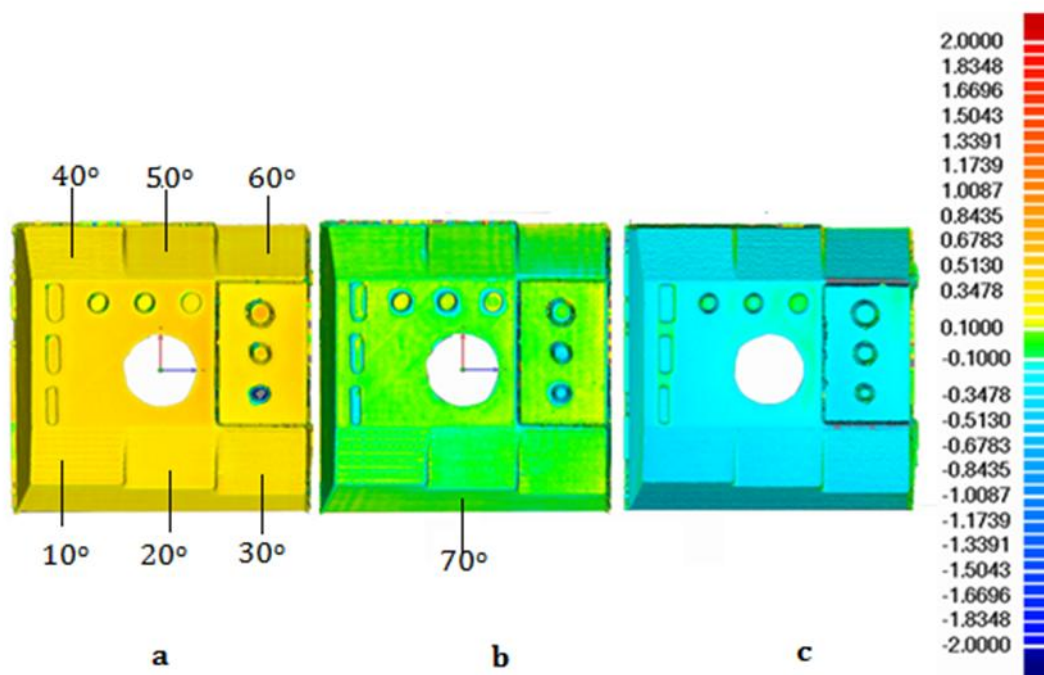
Touch probe scanned spray painted (a), chemical treated (b) and CNC machined (c) ABS test pieces
